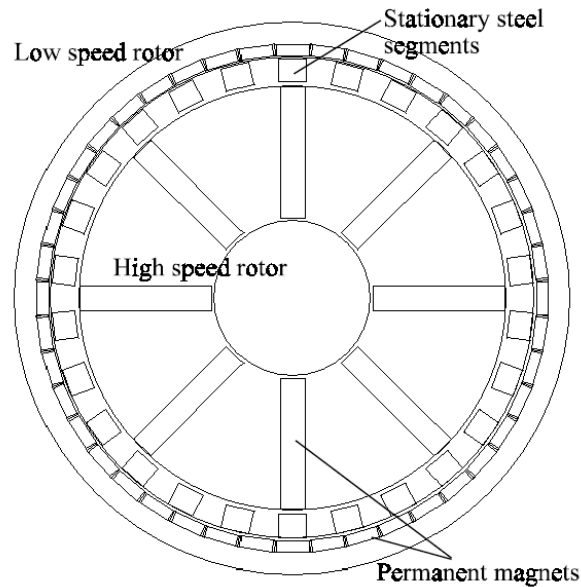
Coaxial Magnetic Gear with Spoke-Type High Speed Rotor Magnets (14)
